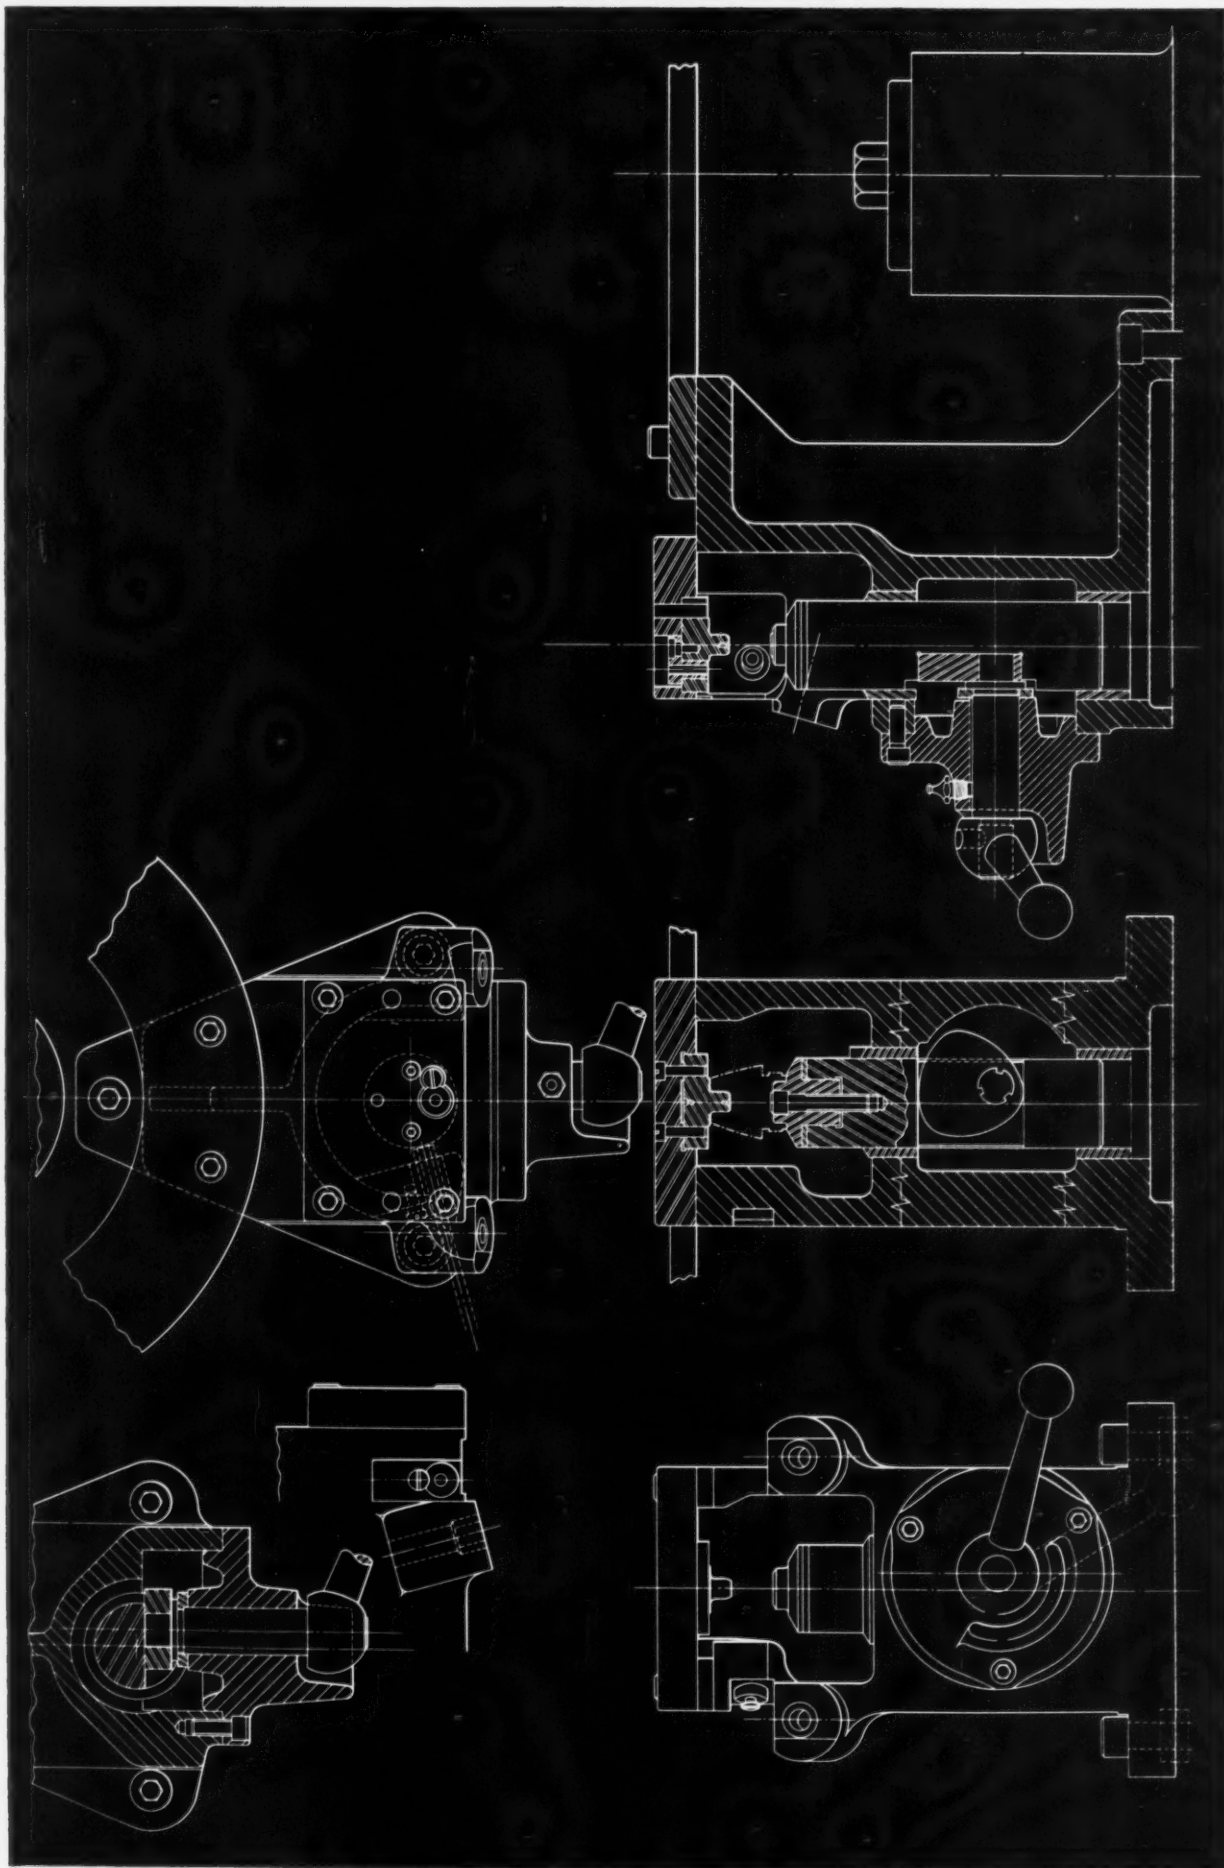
Fixture for Holding the Fuse Body Shown in Fig. 11 during the Second Cycle of Operations
